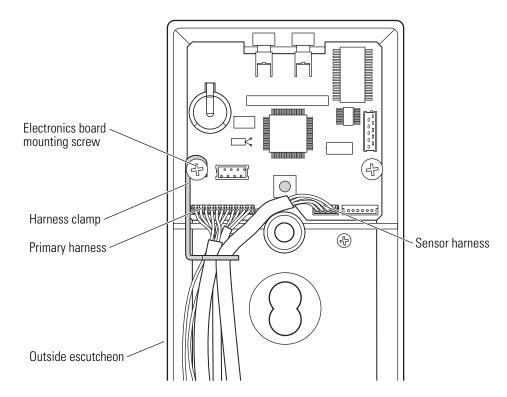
Removing and reinstalling the harness clamp (B.A.S.I.S. smart card reader shown)
